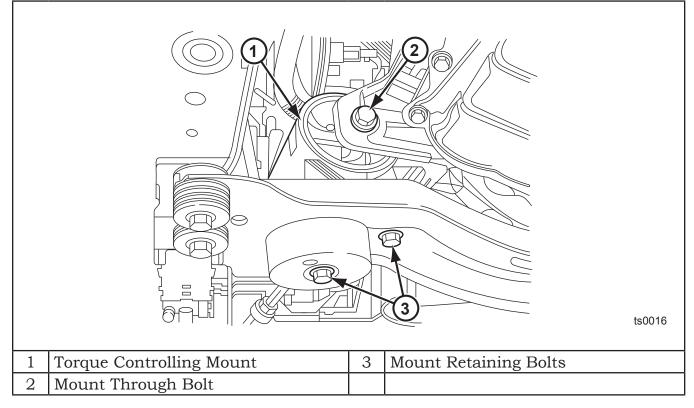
Torque Controlling Front Engine Mount (2.4L JC)
